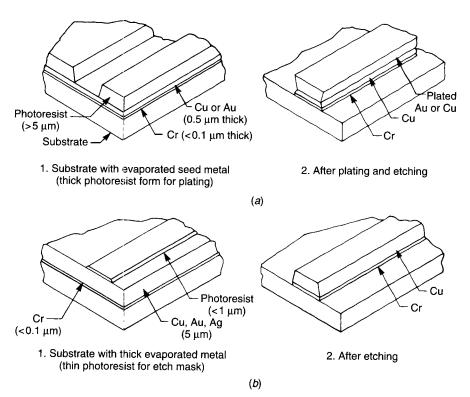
Techniques for defining conductor pattern in hybrid MICs: (a) fabrication by plating and etching; (b) fabrication by etching thin plated metal.
